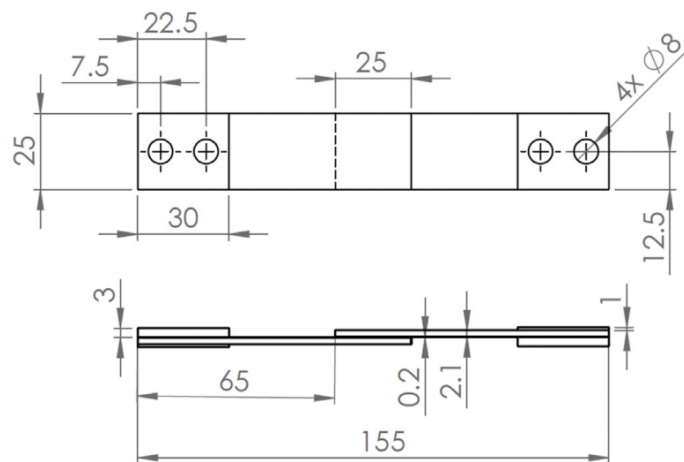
Geometry and dimensions (in mm) of SLJs specimens [12].
